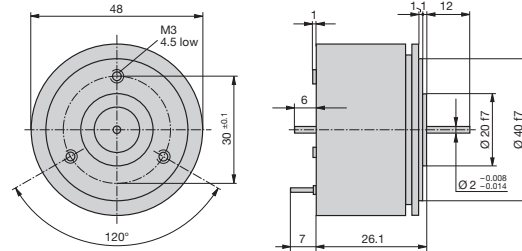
KINAX 3W2 with special drive shaft at front and at rear. At front: Ø 2 mm, length 12 mm. At rear: Ø 2 mm, length 6 mm.
